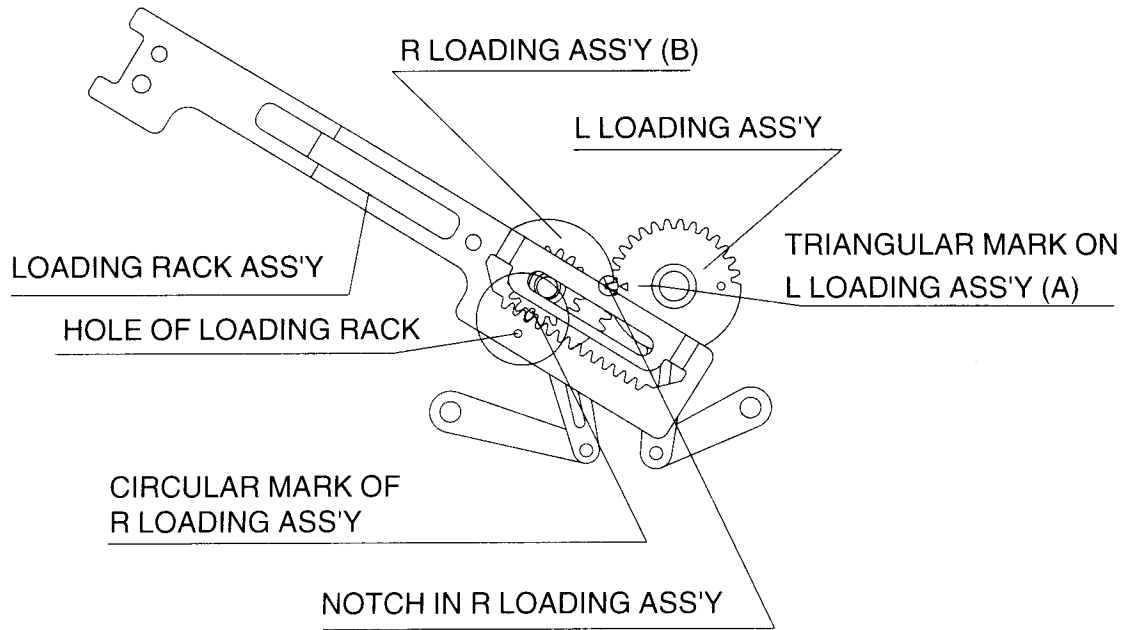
DATUM POSITION OF LOADING RACK ASS'Y & R/L LOADING LEVER ASS'YS
